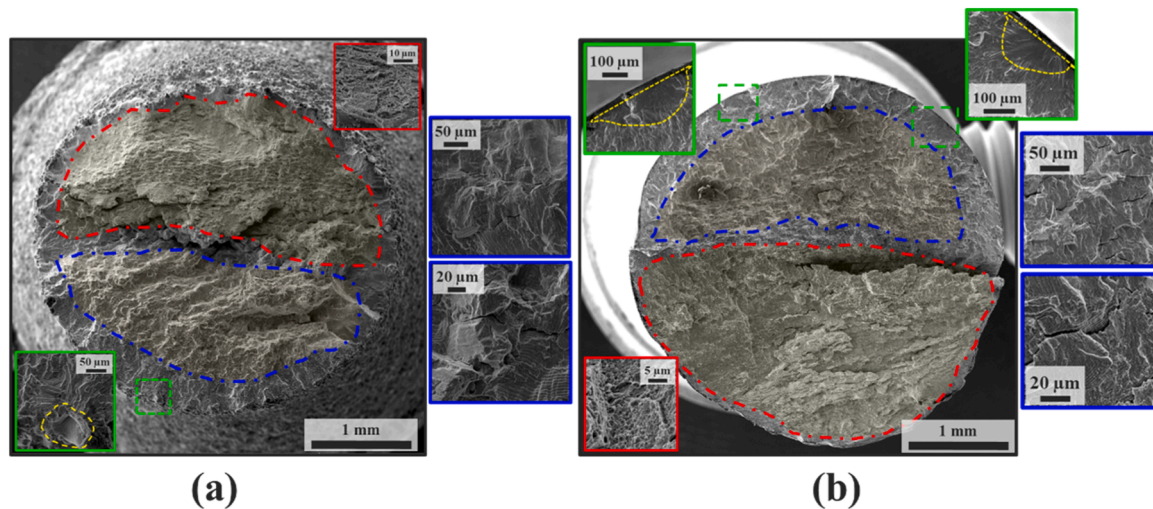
Examples of fracture surfaces of fatigue-loaded LPF-HX samples illustrating different stages of crack development: crack initiation (green), crack propagation (blue), and final fracture (red). (a) HT-AB-0.4 % and (b) HT-M-0.4 %.
